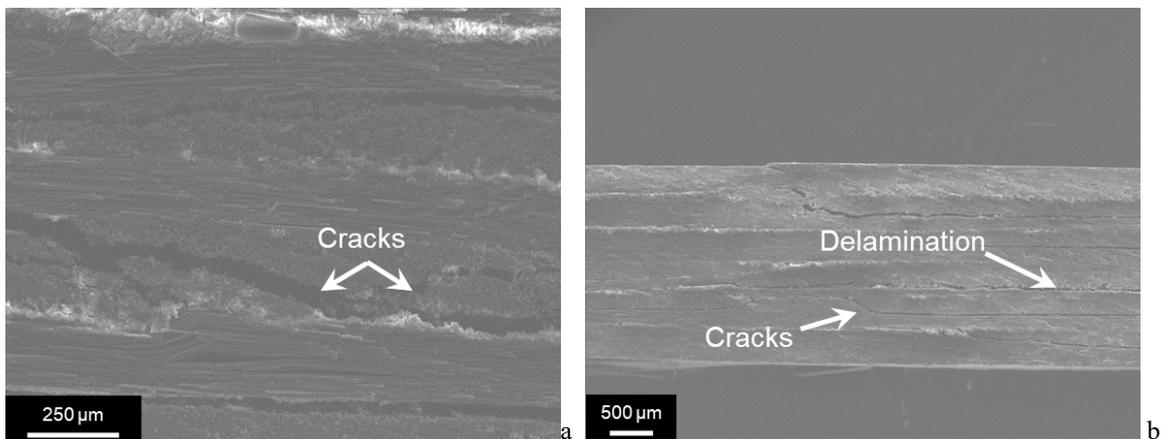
Fracture morphology for the short beam specimen bonded with prepreg resin: a) upper zone; b) lower zone.
